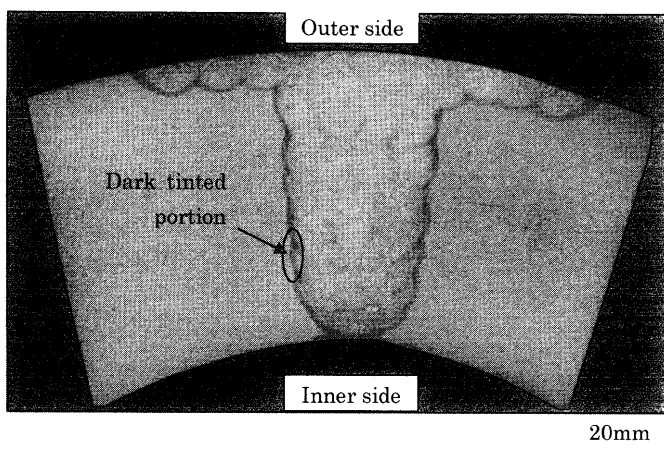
Cross sectional view of the investigated seam weld.
